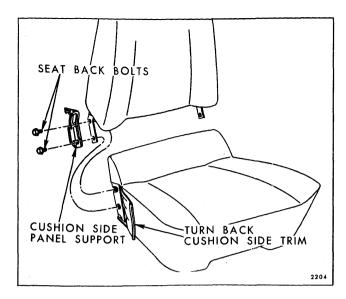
Bucket Seat Back Removal (Without Reclining Seat Back) All Except Corvair
